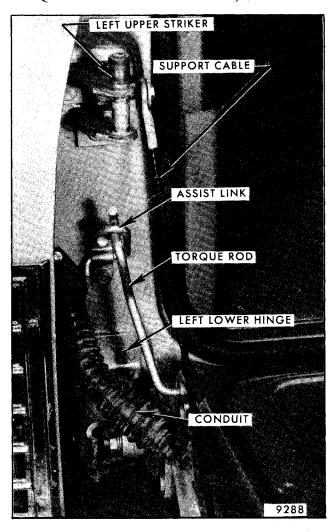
Tailgate Left Upper and Lower Lock Assemblies
